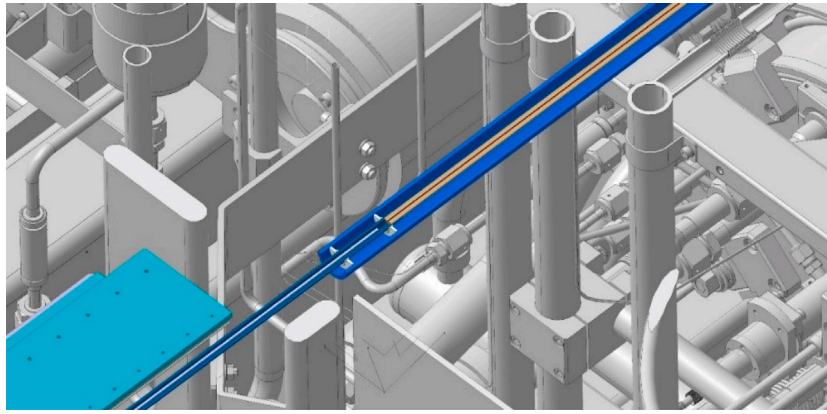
CAD section of the probe: the alumina tube (probe support), inner stainless steel tube, ceramic washers and the shielding outer tube are visible.
